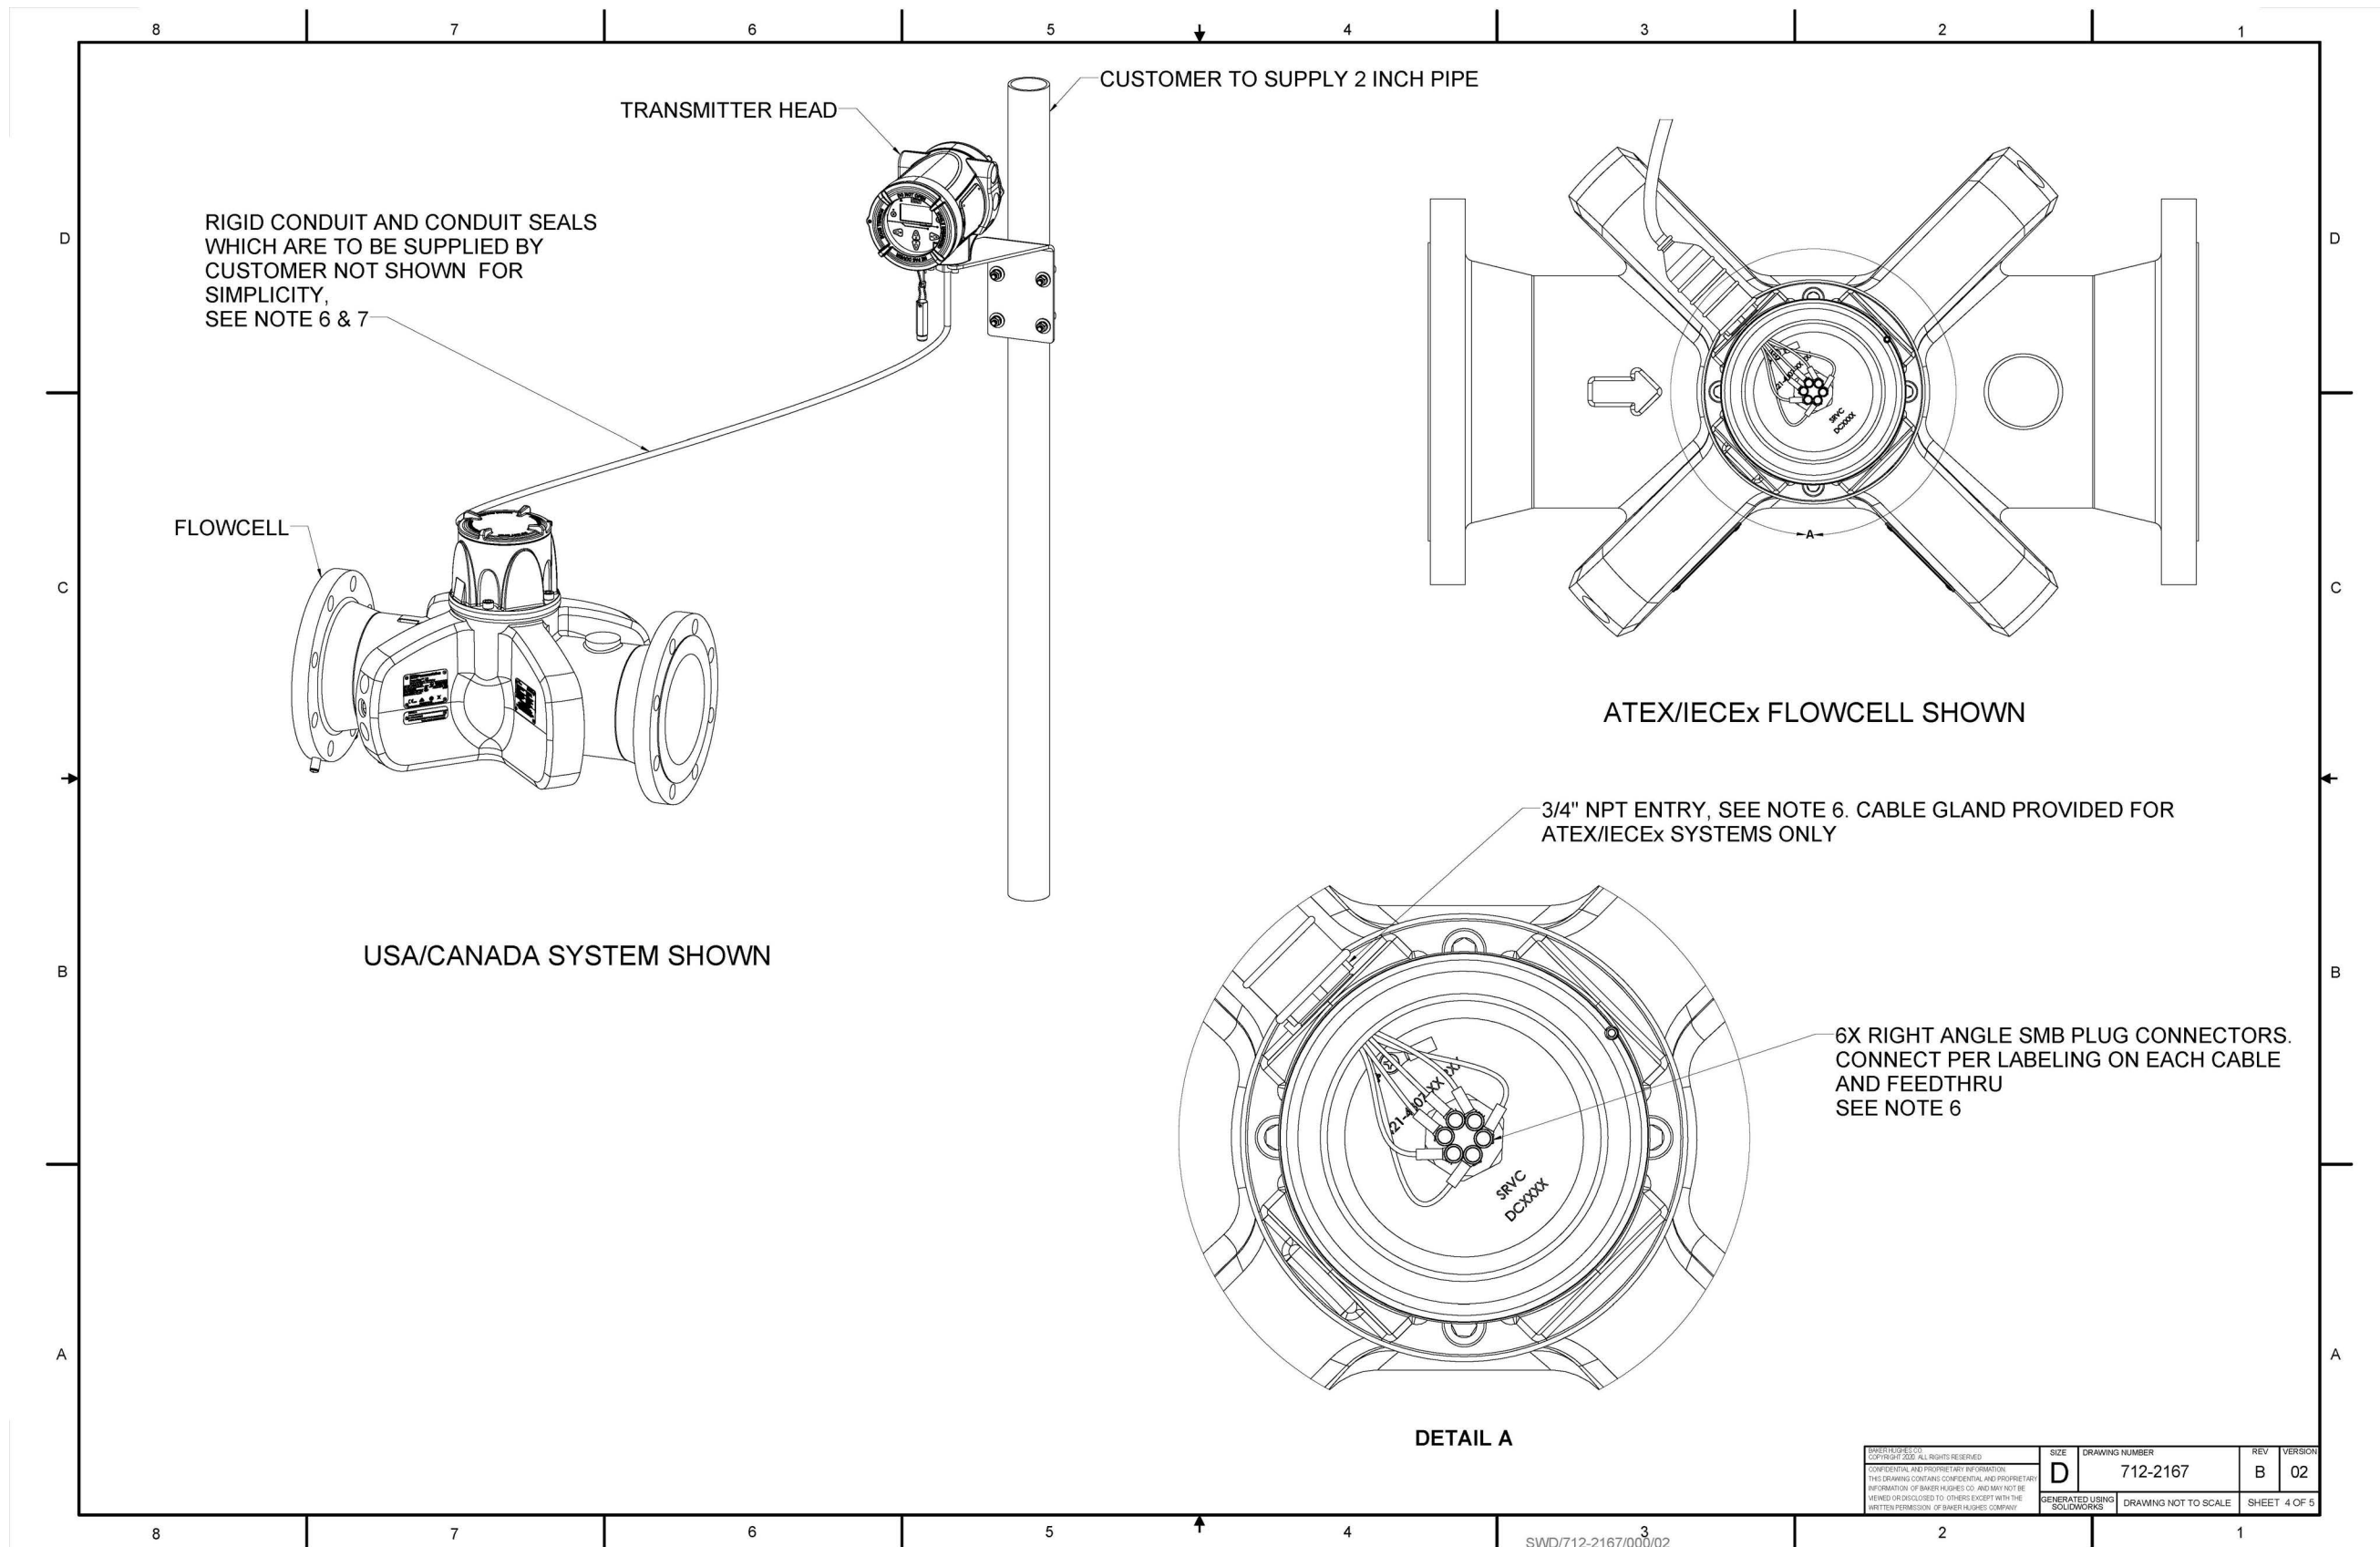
Outline and installation drawing - remote mount (712-2167, sheet 4)
